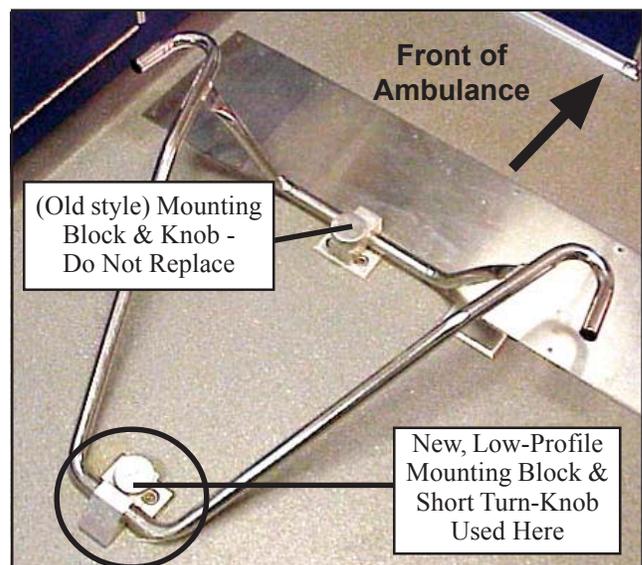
Updated Antler Shown After Rear Mounting Block & Turn-Knob Replaced
